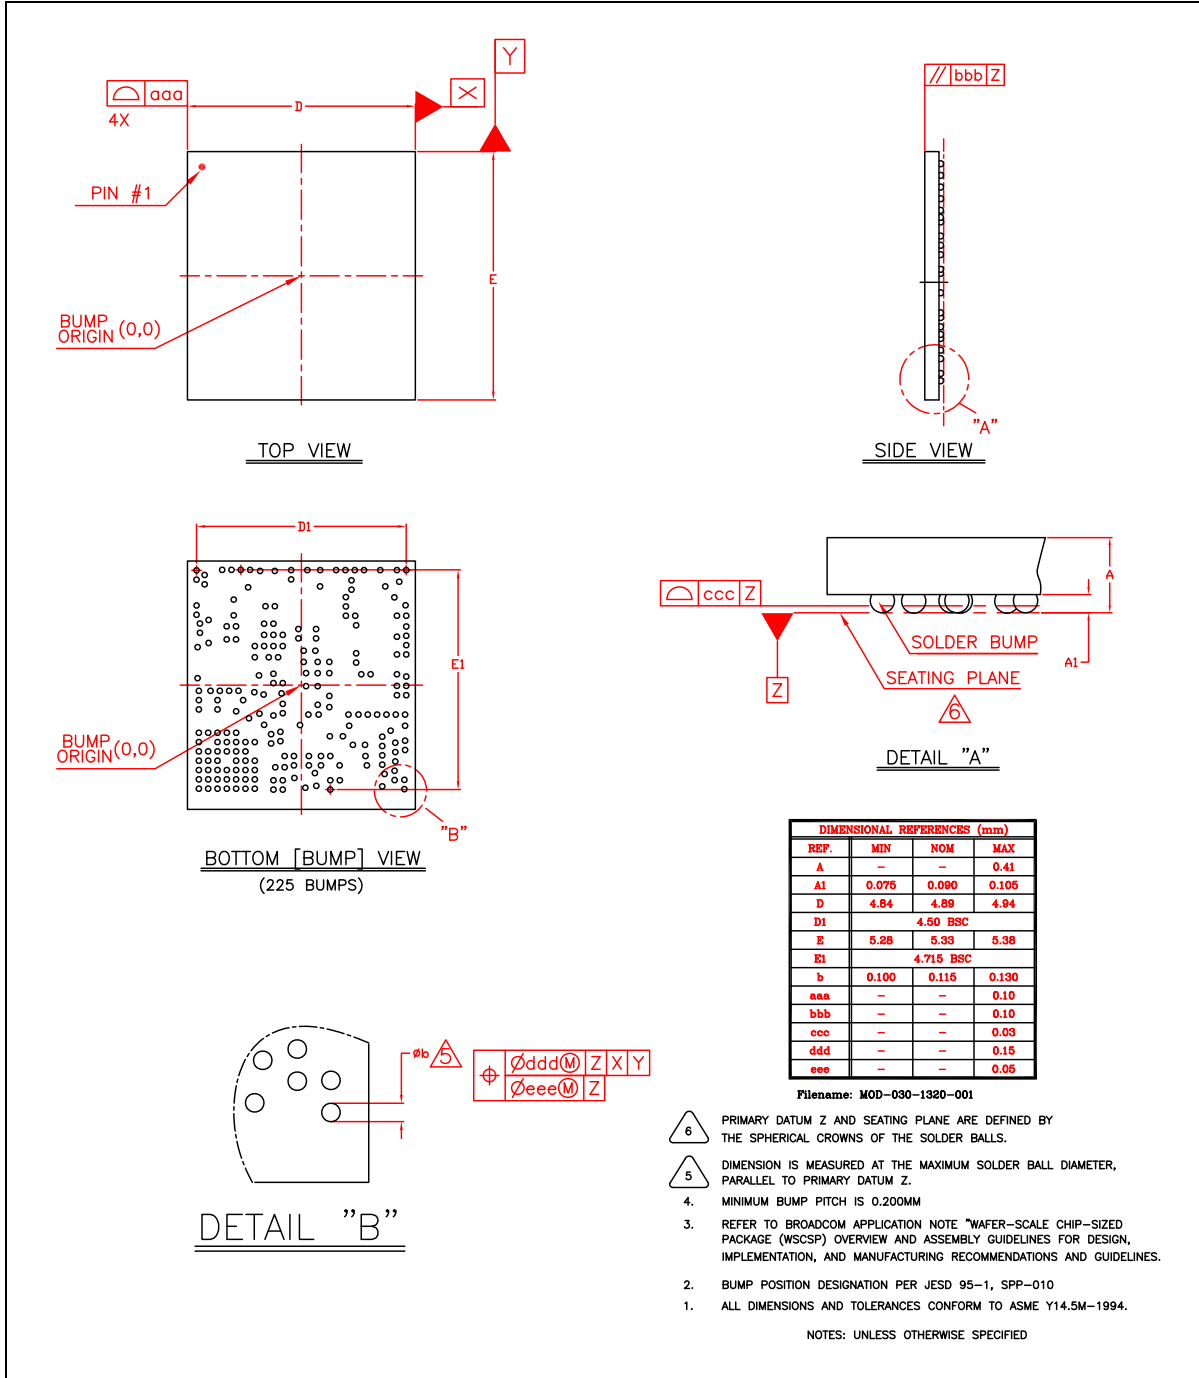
225-WLCSP Daisy Chain Package Outline Drawing
